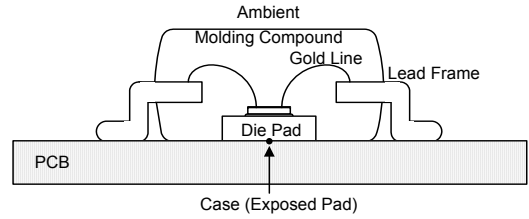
SOP-8 (Exposed Pad) Package Sectional Drawing
